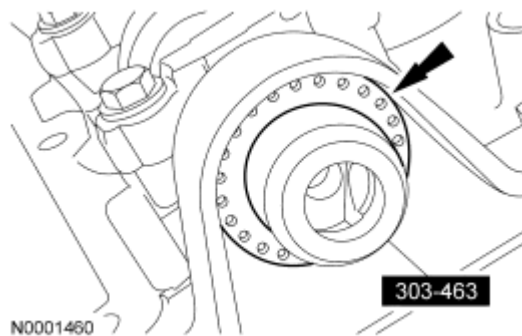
Positioning Special Tool & Camshaft Oil Seal On Camshaft
